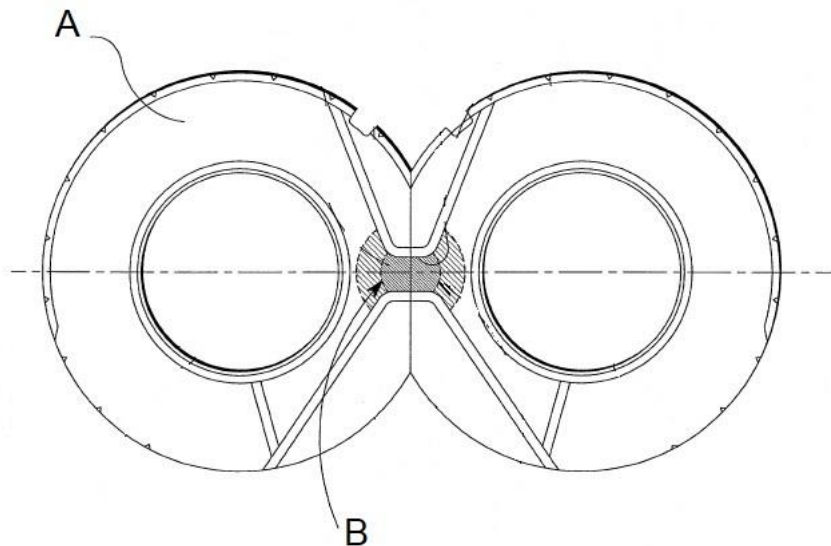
Schematic diagram of bearing of an aeroengine fuel pump. (A) demonstrates the bearing and (B) demonstrates the position that is vulnerable to corrosion erosion [3].
